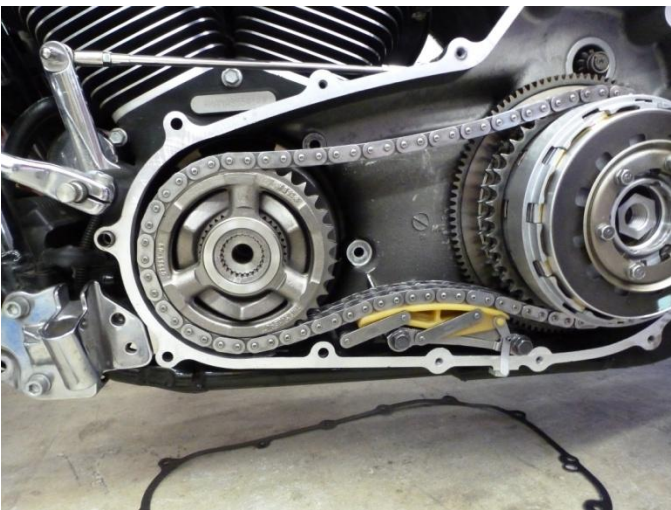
; Remove the 2, 5/16" bolts from the inner primary to the rear of the sprocket
